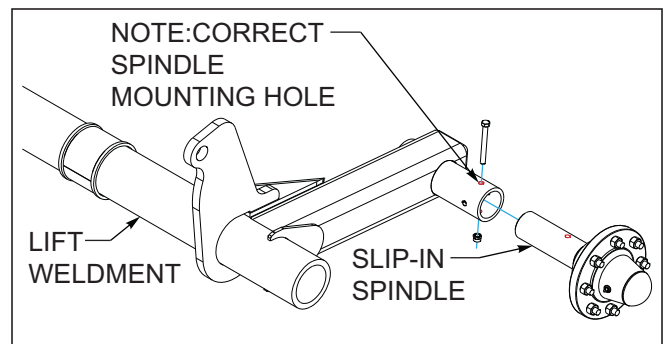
Spindle Mounting 1770-40, 1790-52' & 1710-64'
